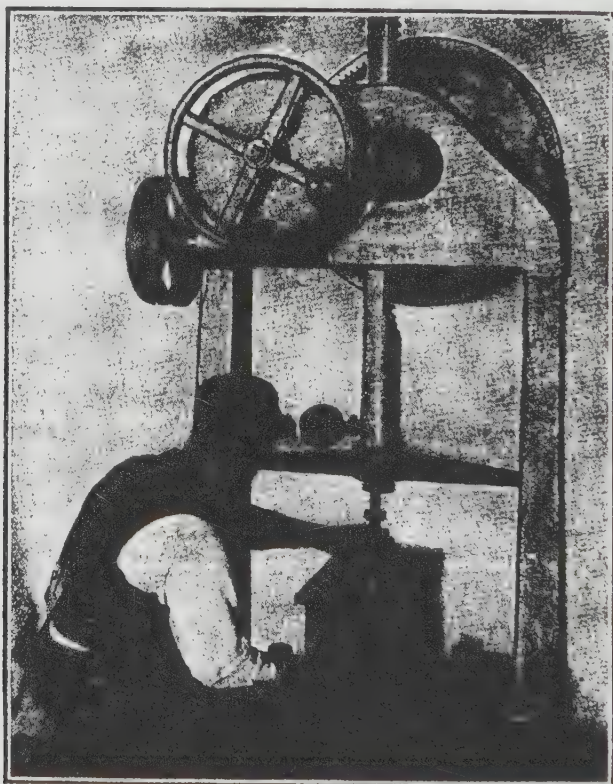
FORCING GEARS ONTO SECONDARY SHAFT.
